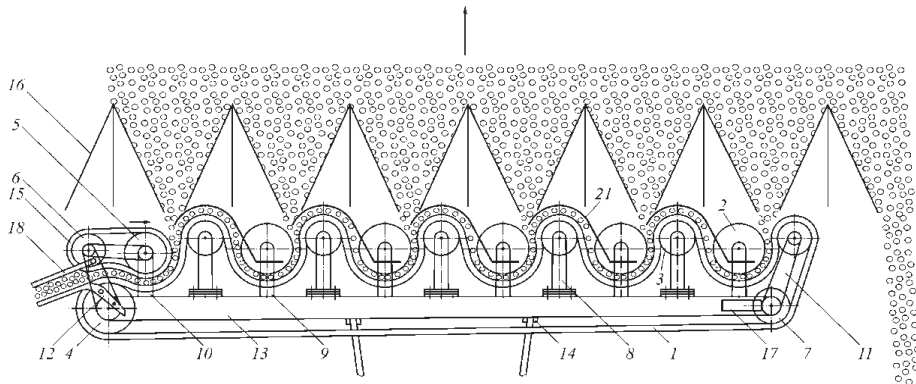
Scheme of a tearing machine with narrow-clawed sections: 1 – tethering belt, 2 – trolley pulleys, 3 – trolley rollers, 4 – drive pulley, 5-pulley of the cocking device, 6 – roller of the cocking device, 7 – guide roller, 8 – brackets for trolley rollers, 9 – brackets of trolley sheaves, 10 – bracket of the outrigger pin, 11 – bracket for the right pulling and guide rollers, 12 – bracket for the outfit roller, 13 – frame, 14 – bracket for connection to the tractor hitch, 15–16 dividers 17 – tensioning devices oh 18 bars output device.
